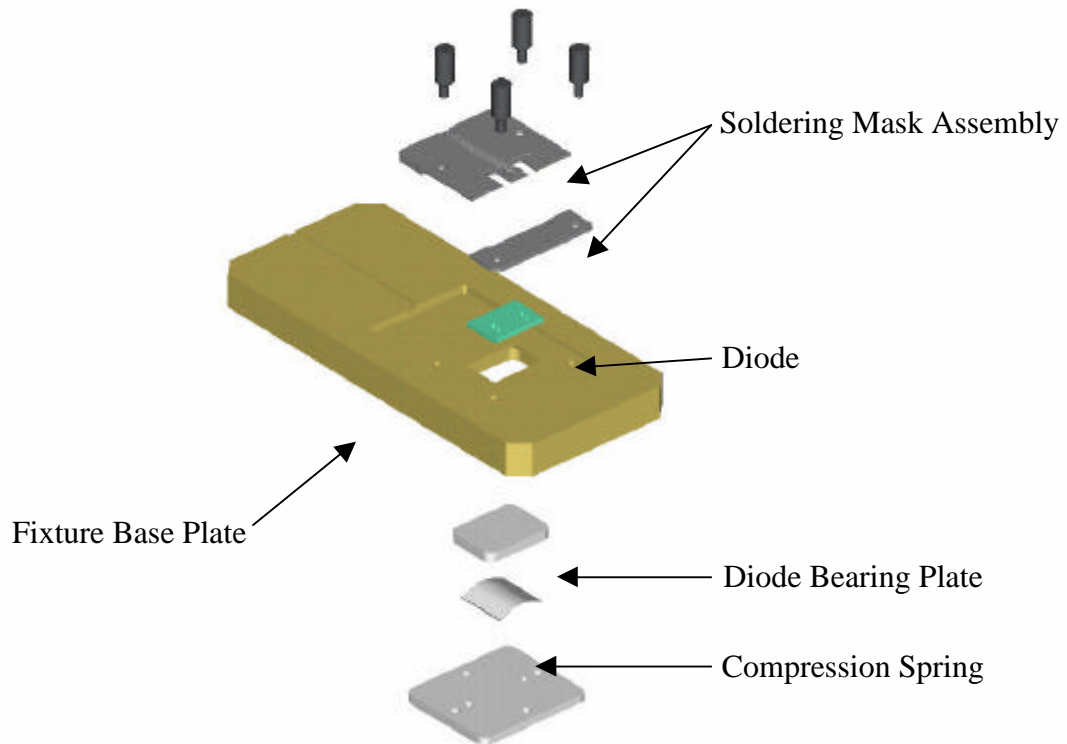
Exploded View of Tooling Configured to Solder PIN Diode Leads
